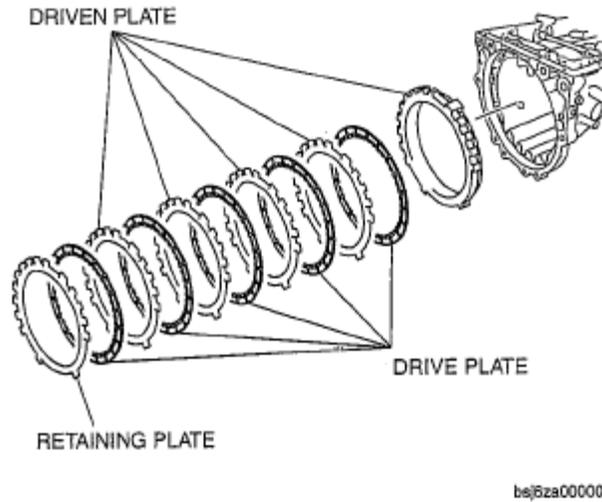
Identifying Retaining Plates, Drive And Driven Plates
